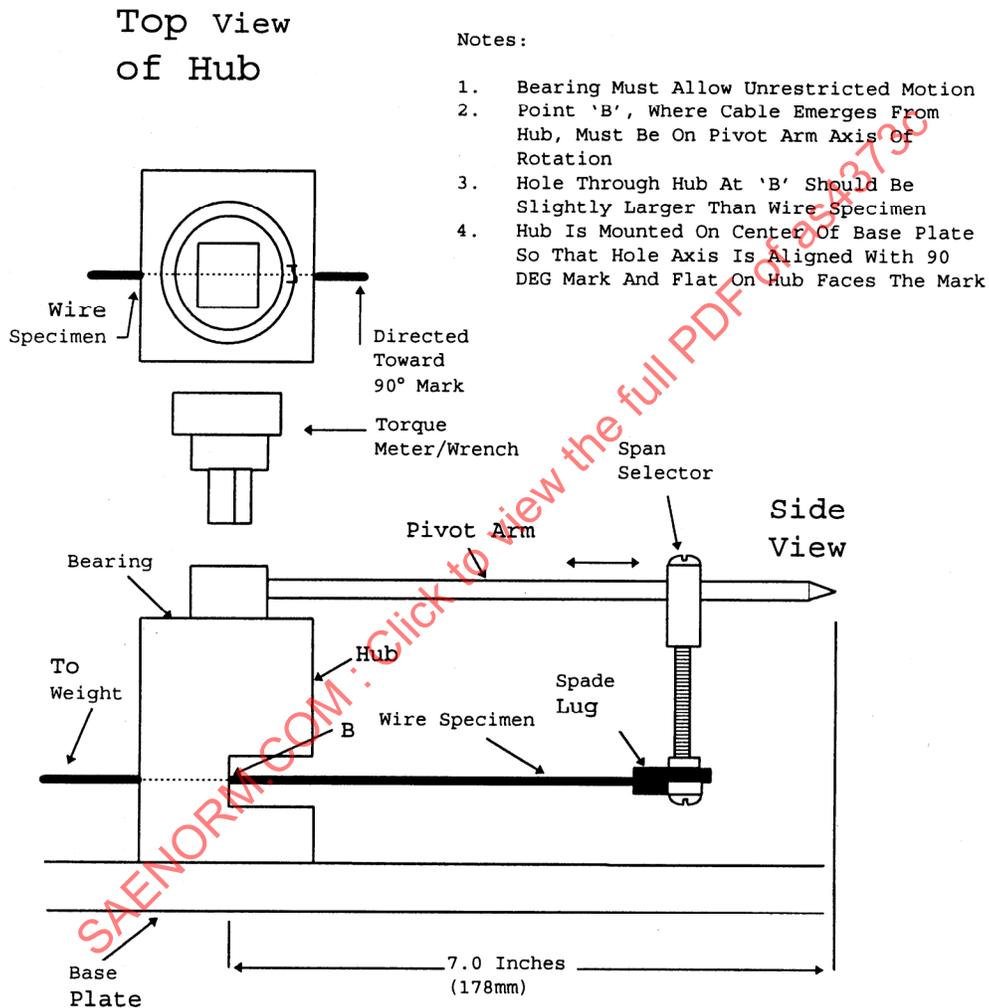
TEST FIXTURE FOR STIFFNESS AND SPRINGBACK TEST
